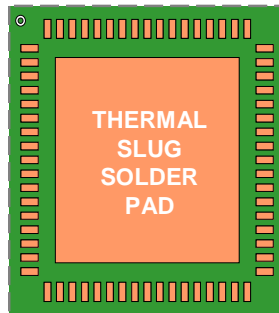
Circuit board land pattern for QFN with bottom side paddle
